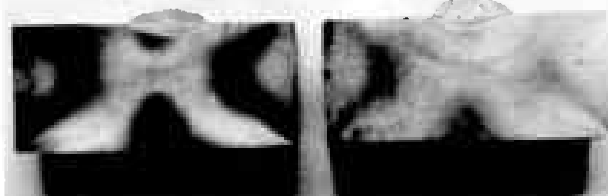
Typical Macro Etch Specimens from Bead-on-Plate Weld Tests Showing Size and Shape of Weld Deposits.
